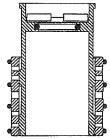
LUBRICATED APA VALVE ASSEMBLY P/N 11-6152A000
